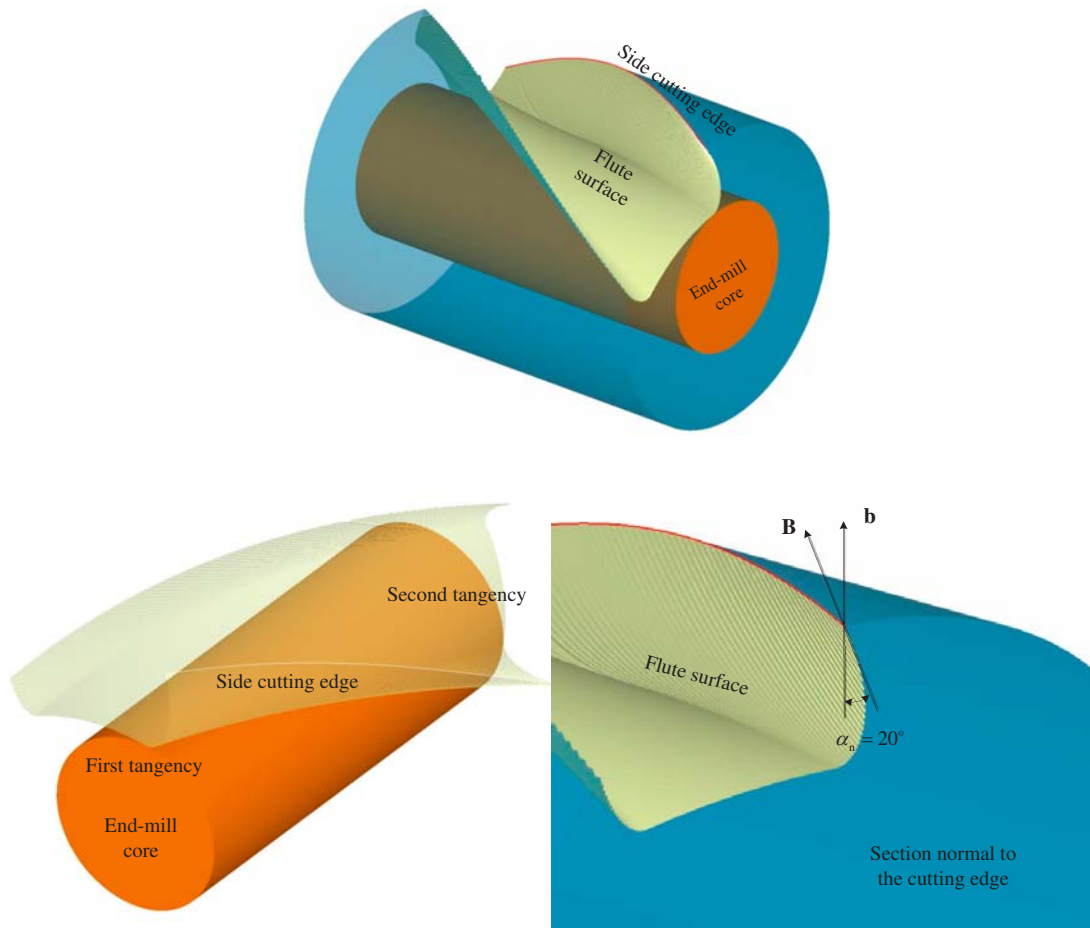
Cylindrical flat end-mill ground using grinding process III.
